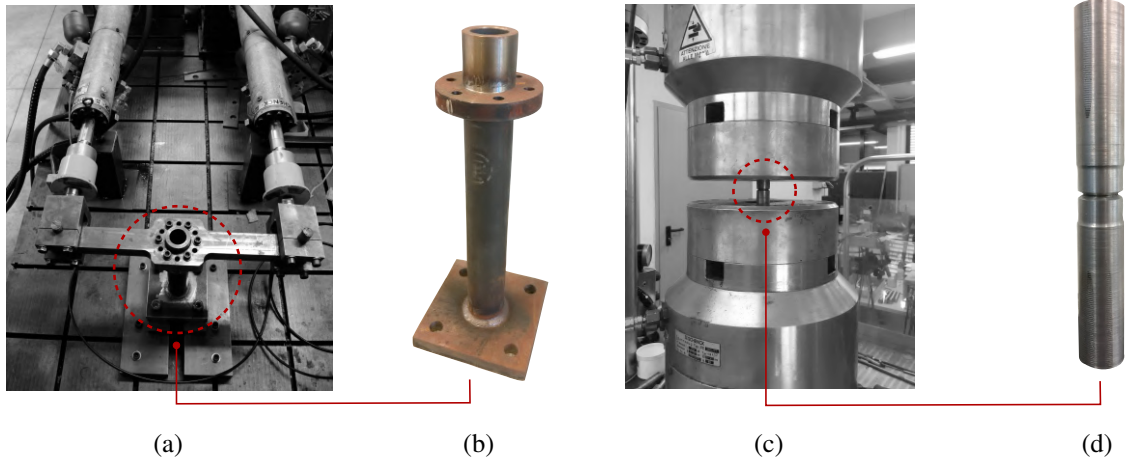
Test-bench employed for fatigue testing of welded joints (a), pipe-to-plate welded joint (b), test-bench employed for fatigue testing of notched specimens (c), notched specimen (d)
